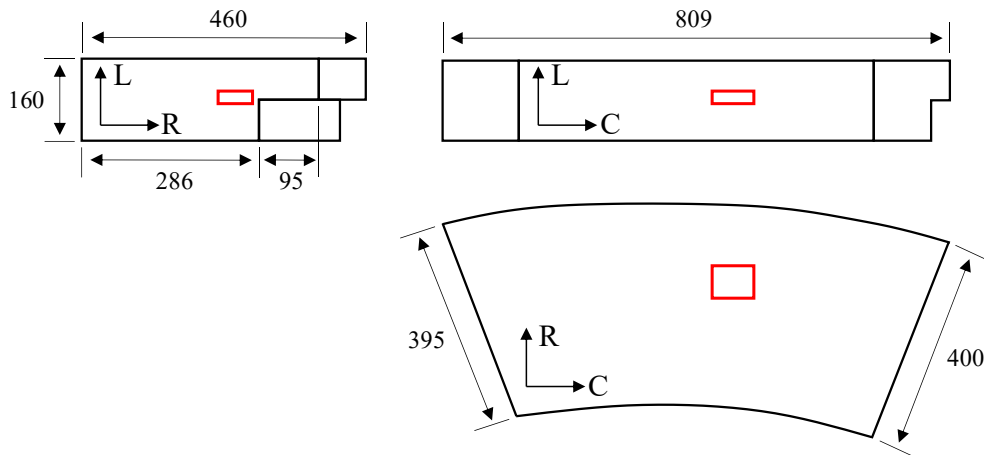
SA-508 Cl.3 forging dimensions and orientations (dimensions in mm) with location of extracted block in red
